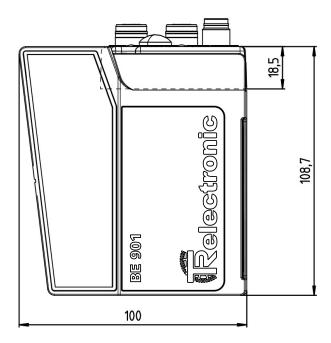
Dimension drawing BE 901 PB with BE 901 MS PB connection hood (all dimensions in mm)
